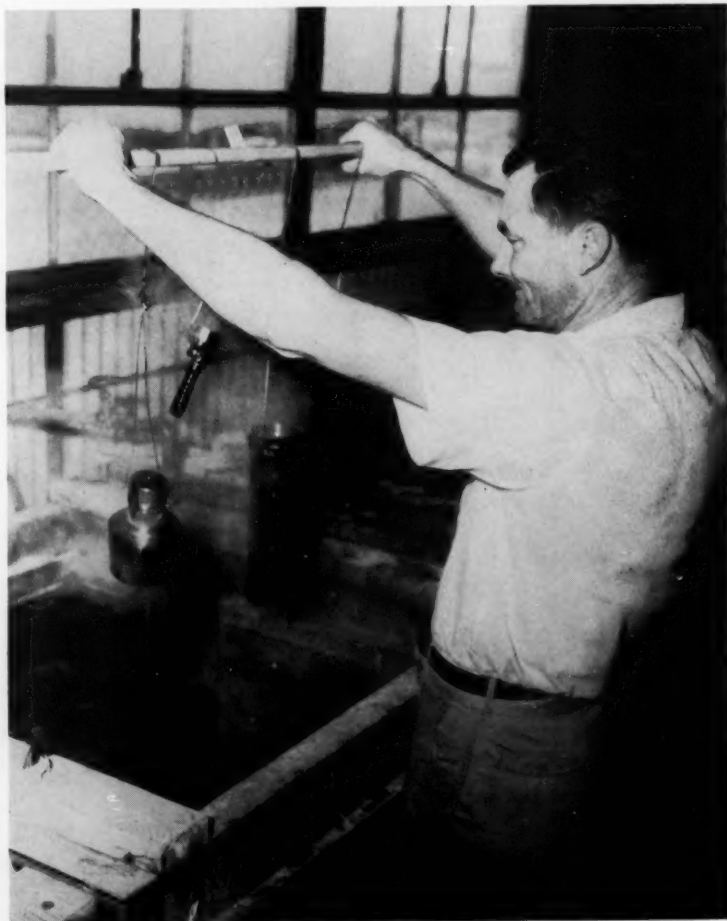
A Chemplate worker removes nickel-plated parts from an electroless processing bath.
